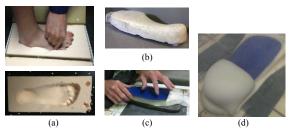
Fabrication of rigid and semi-rigid FOs: (a) foam impression box, (b) plaster mold made out of the foam box, (c) laying the thermoplastic sheet over the mold, and (d) adding the heel block and vacuum forming.
